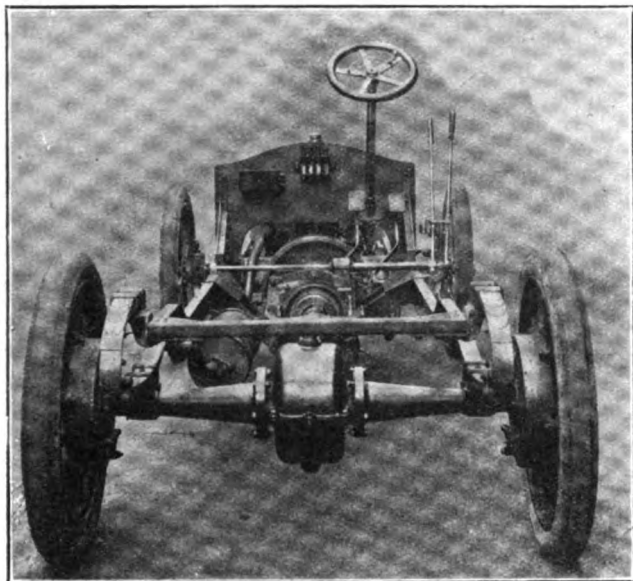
Rear View of Chassis of the 14-20-h.p. Badminton Car.
